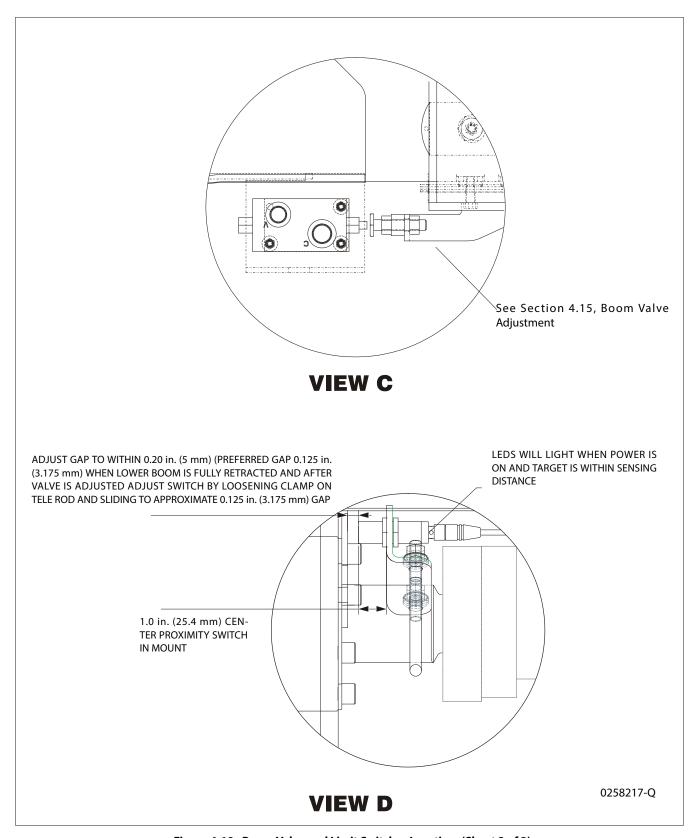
Boom Valve and Limit Switches Location. (Sheet 2 of 3)
